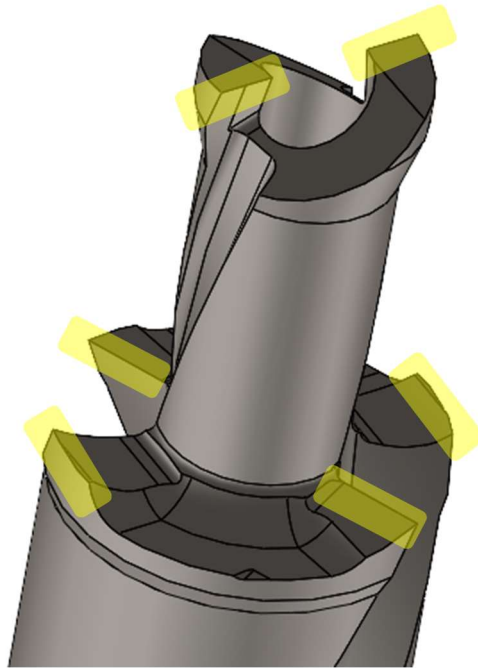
Cutting edges to be checked using a gauze pad or similar material
